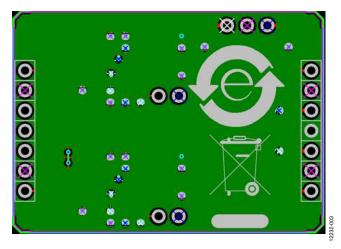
6-Lead SOT-23 ADC Driver, Solder Side
